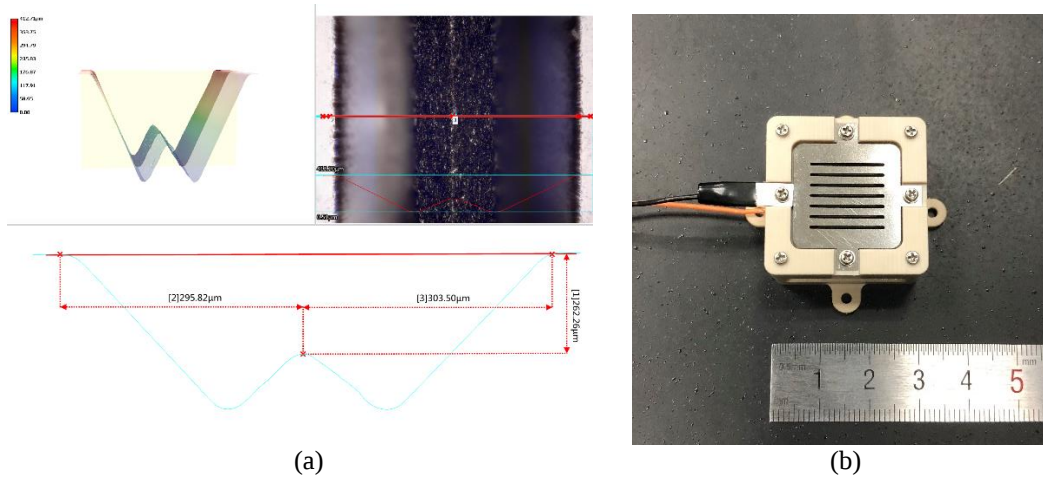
Assembly of the ionic liquid electrospray thruster: (a) alignment under microscope and (b) the assembled thruster.
